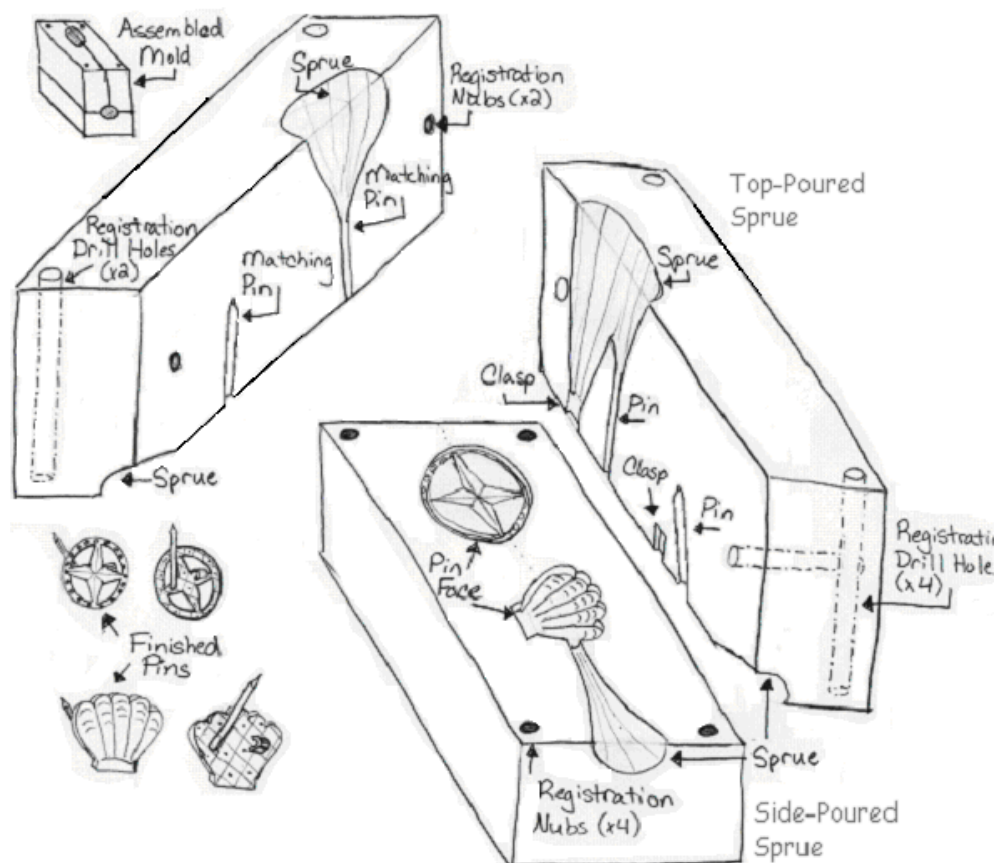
Cast Badge Mold Layout – Michele Wolf
